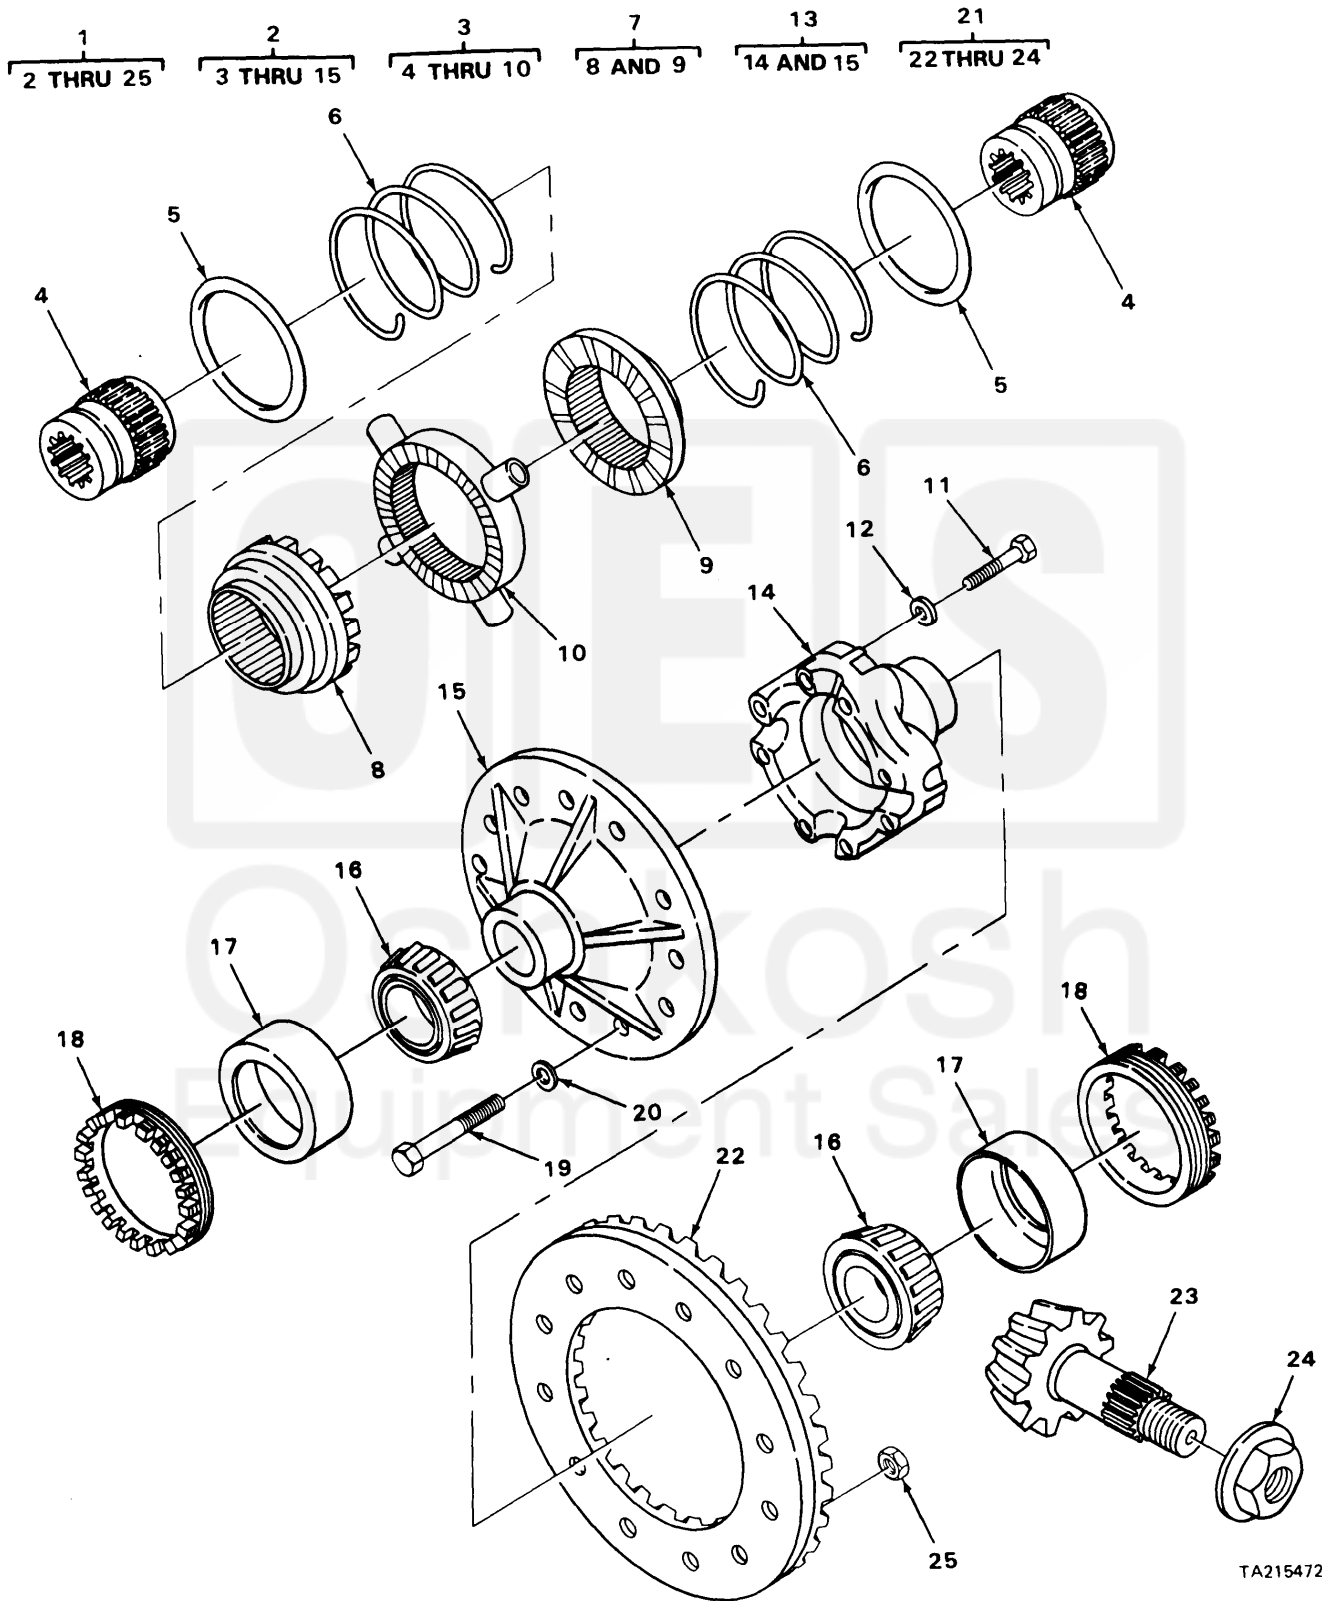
DIFFERENTIAL DRIVE GEAR AND PINION ASSEMBLY (MODEL M915).
